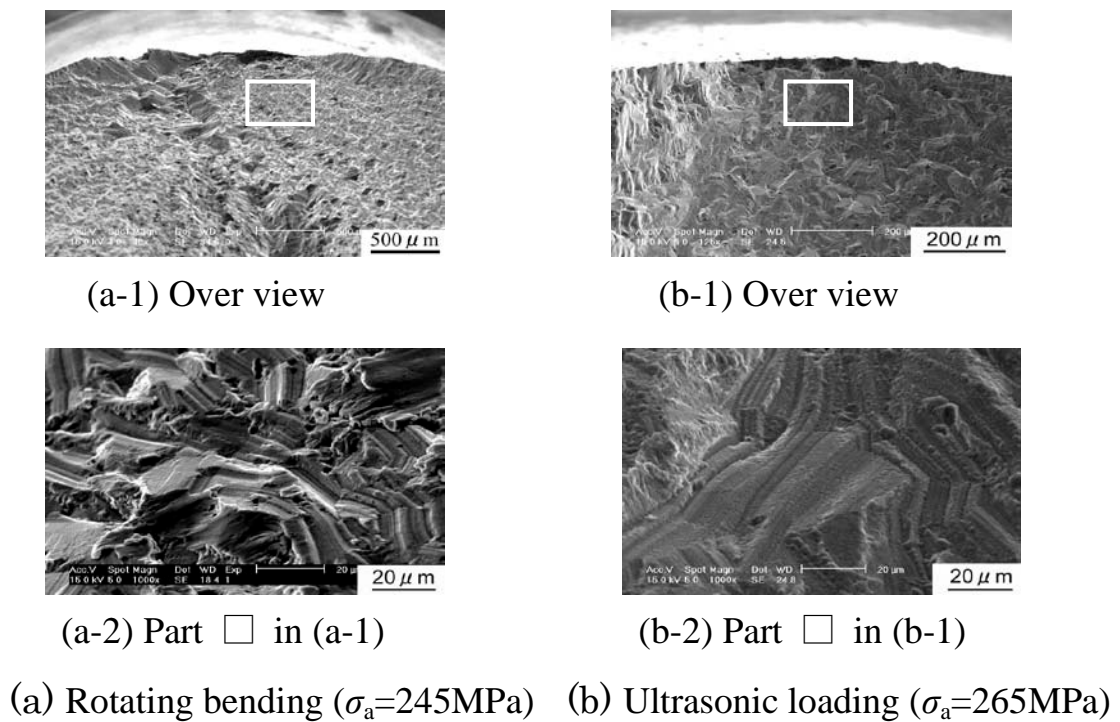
Fracture surfaces in nitrogen gas (shear mode).
